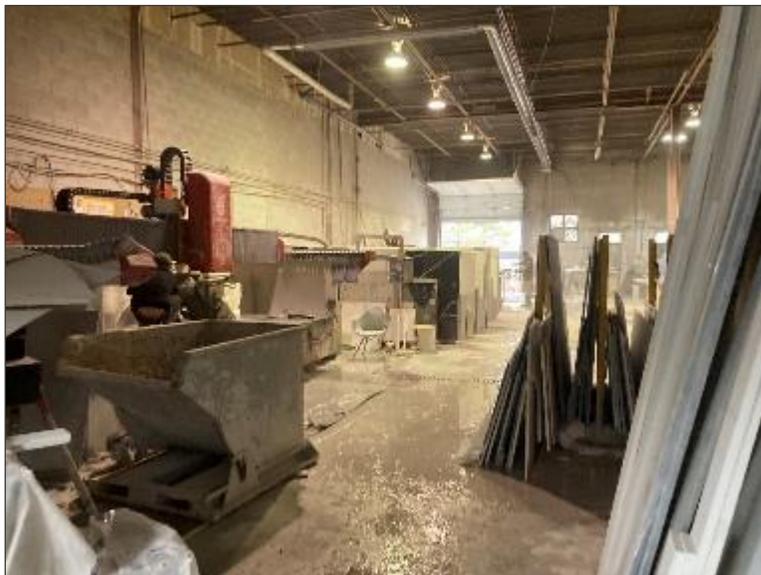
View of interior of Units 19 and 21 of Site Building B.
